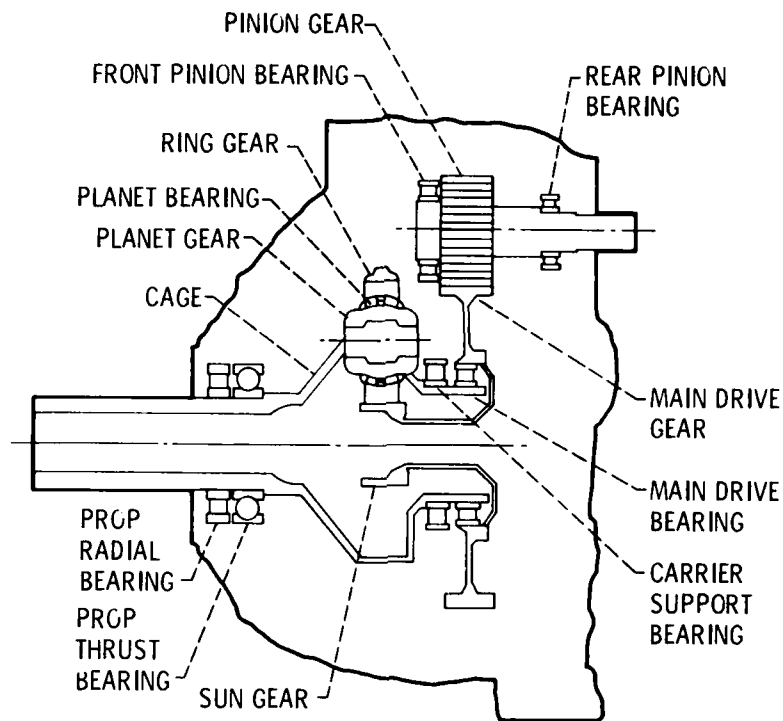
Typical turboprop reduction gearbox (ref. 12).
